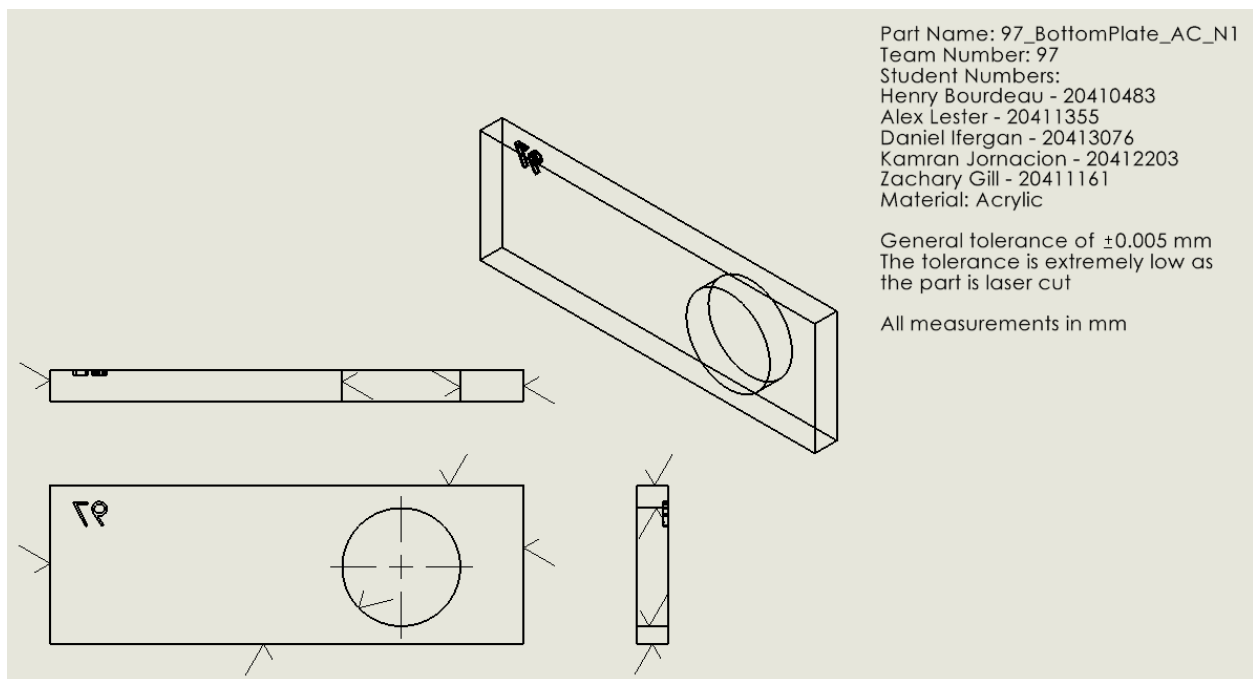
Working drawing for 97\_BottomPlate\_AC\_N1
